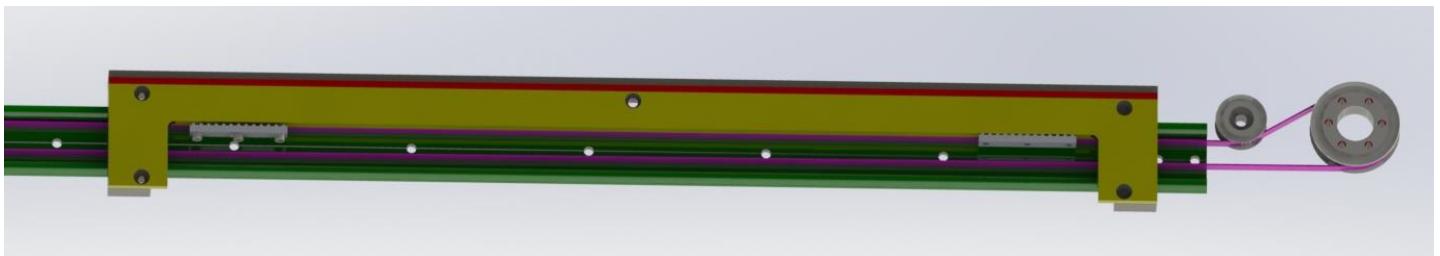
The layout of the drive pulley and tension pulley to move the shuttle
